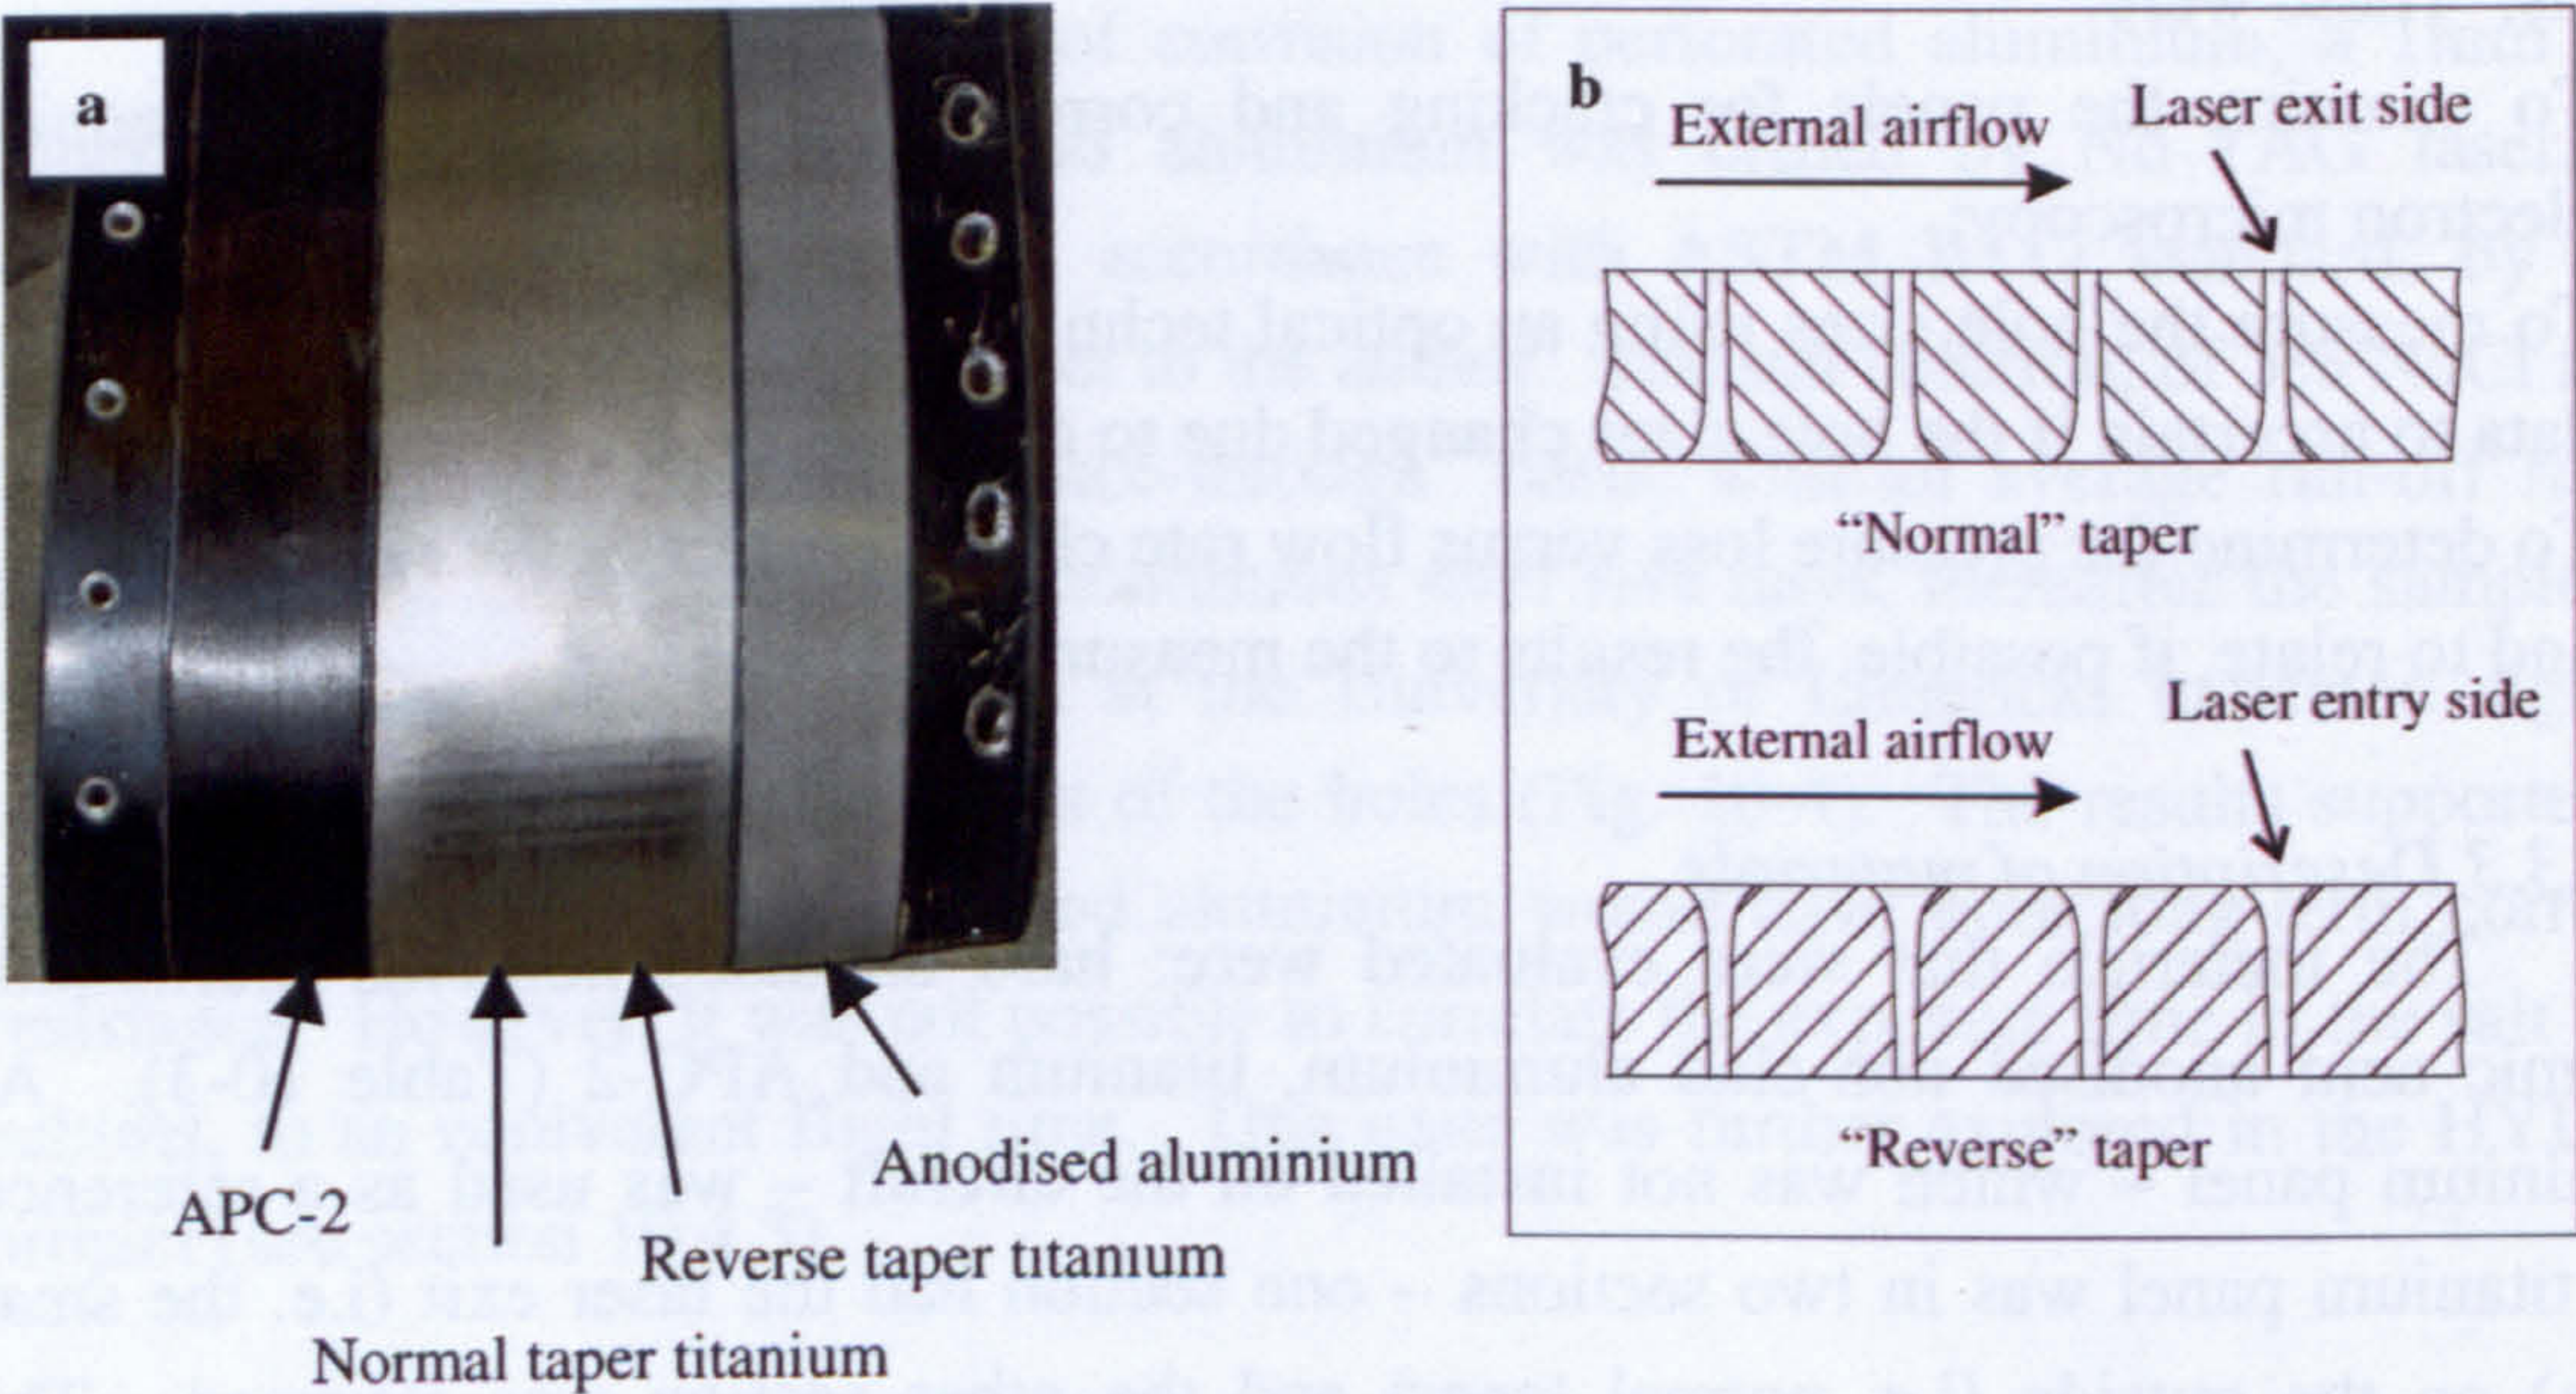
(a) Test panels installed in holder (b) Detail showing normal and reverse taper
